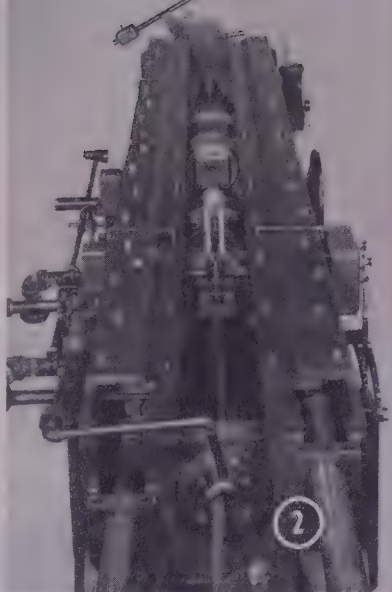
View of drawbench showing drawing die in foreground. Inside the drawbench bed are seen the two reciprocating carriages for pulling stock continuously through die
